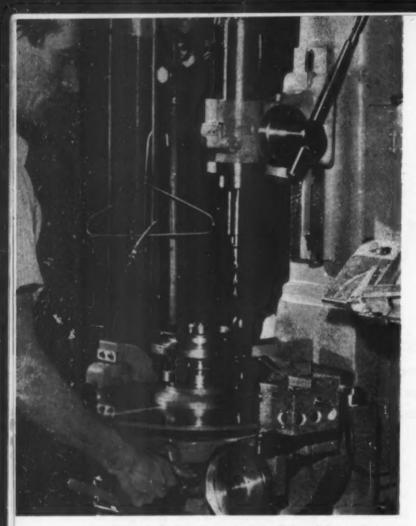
Static balancers are generally used for measuring and correcting unbalance in disc-like parts such as the belt pulley and vibration damper assembly shown
